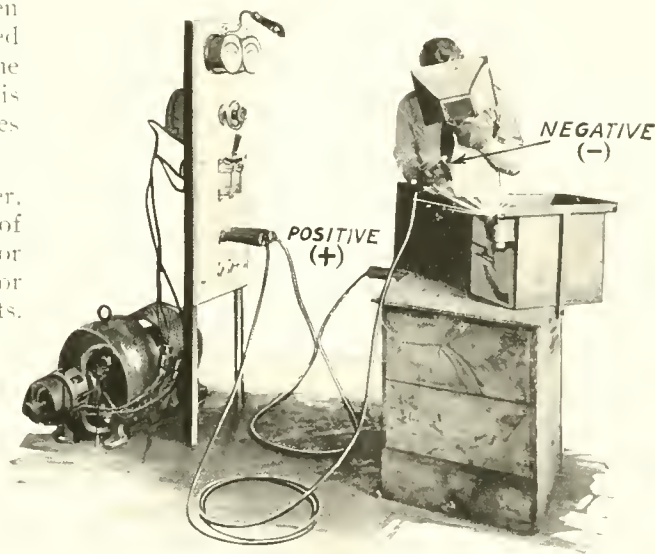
In arc welding, one wire (the positive) from the welding apparatus is attached or laid upon the steel which is to be welded; the other wire (the negative) is attached to the electrode of carbon or metal which the operator holds.
